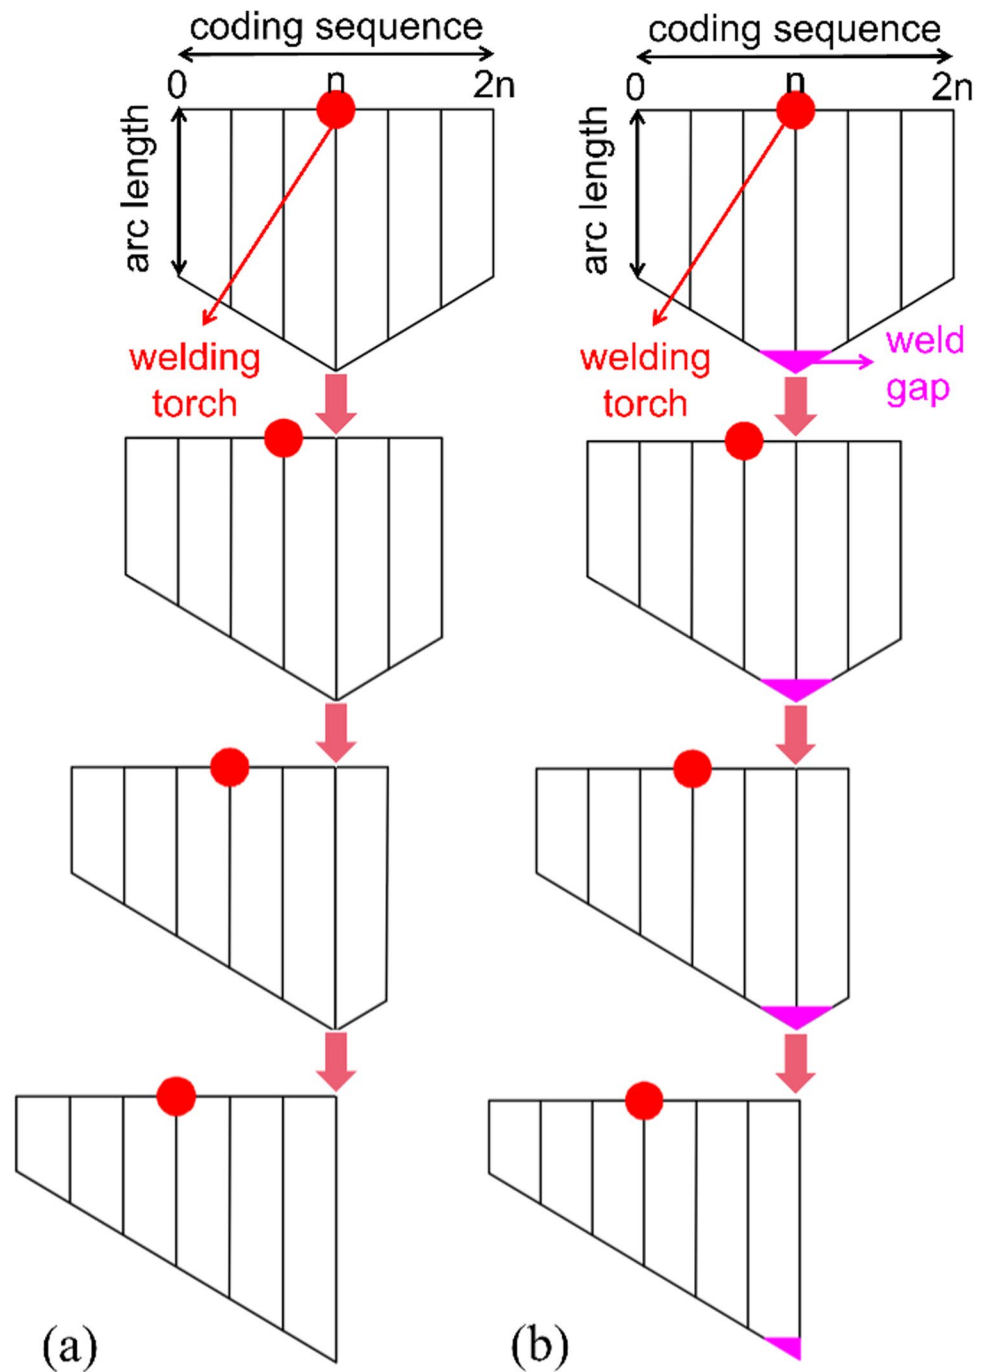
Positional relationship between the welding torch and the weld seam and the welding torch. a Under the condition of no gap, the relative position between the welding torch and weld seam changes from centering to left deviation. b Under the condition of the gap, the relative position between the welding torch and weld seam changes from centering to left deviation
